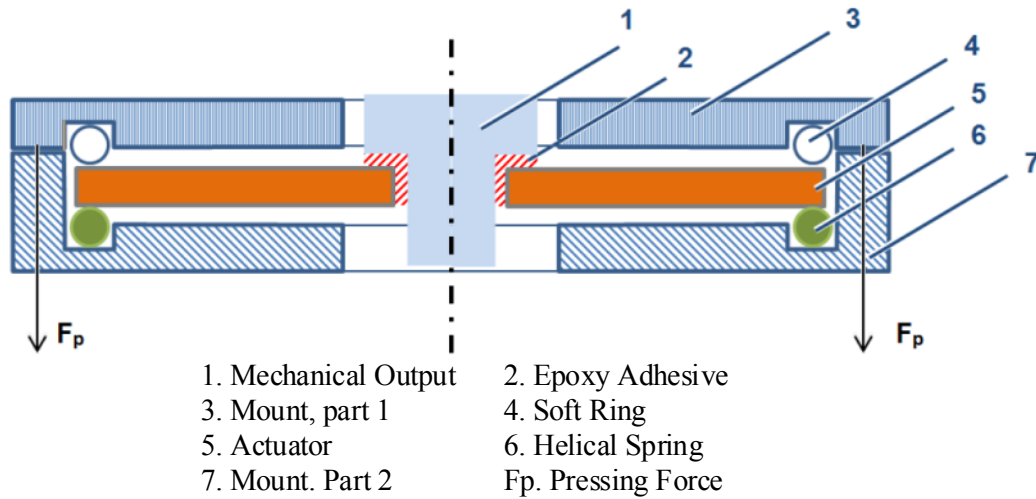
Mounting for a piezoelectric ring bender using a helical ring and a soft rubber ring [58].
